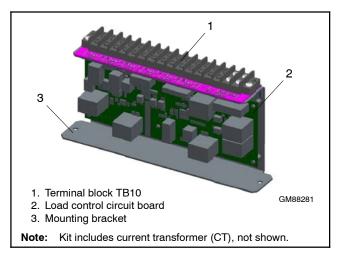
Load Shed Assembly GM88281-1 (mounts inside the transfer switch enclosure)
